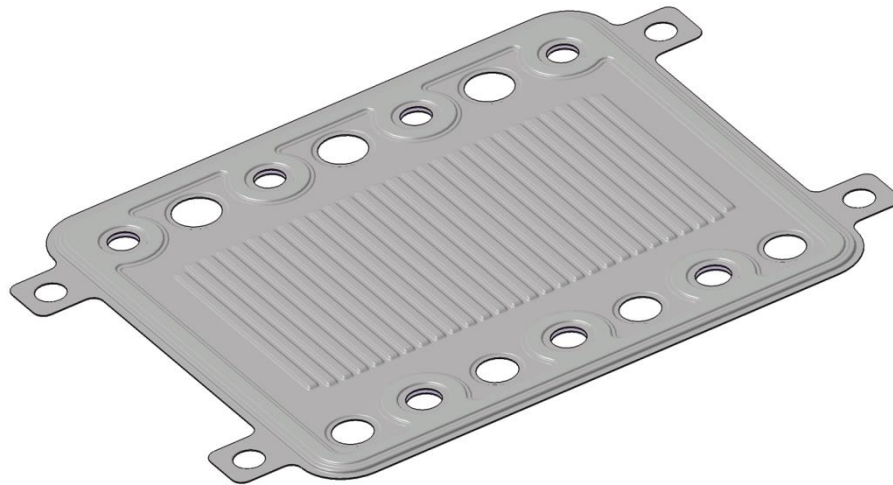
Design CS^{IV}: Cassette after laser welding– tray side.
